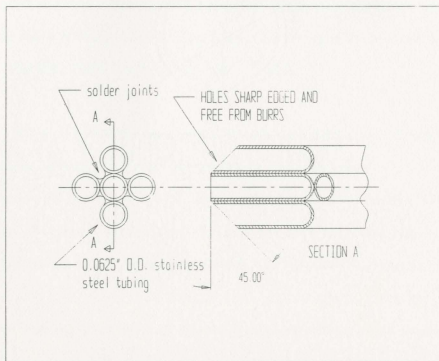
Geometry of Conical Tip 5-Hole Pitot Tube Probe
